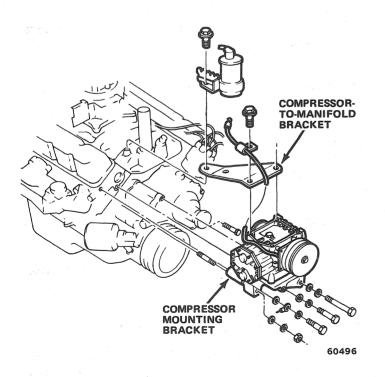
E-19 Compressor Mounting—49-State Eight-Cylinder Engine
